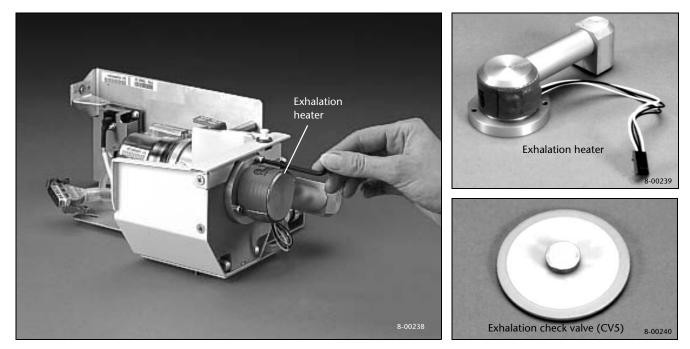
Replacing exhalation heater (EXH HTR) and check valve (CV5)
